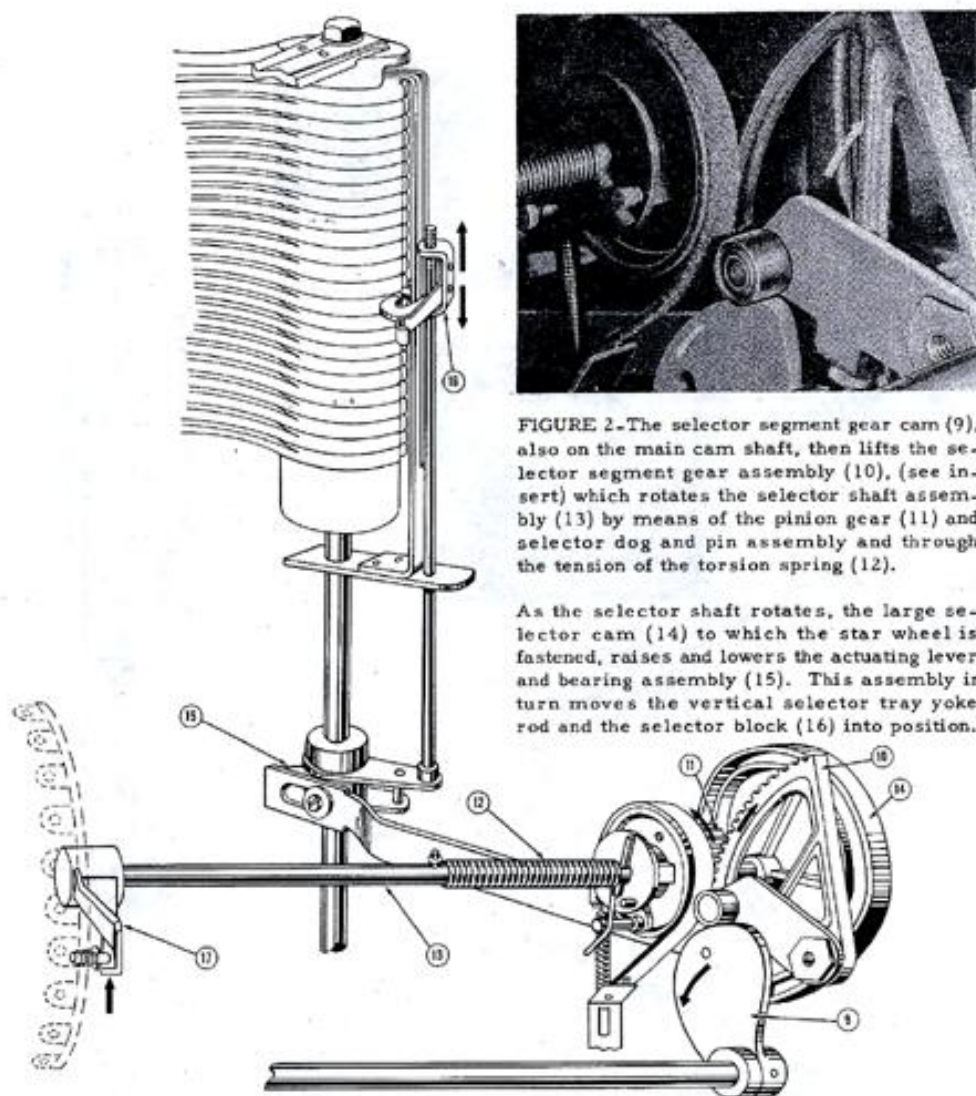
The selector segment gear cam (9), also on the main cam shaft, then lifts the selector segment gear assembly (10), (see insert) which rotates the selector shaft assembly (13) by means of the pinion gear (11) and selector dog and pin assembly and through the tension of the torsion spring (12).
